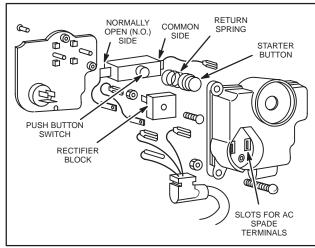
EXPLODED VIEW – CONTROL ASSEMBLY
